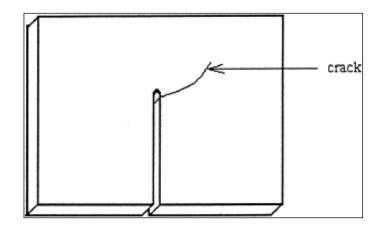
Sketch of a plate with a crack occurring during laser cutting (Lu et al., 1999)
